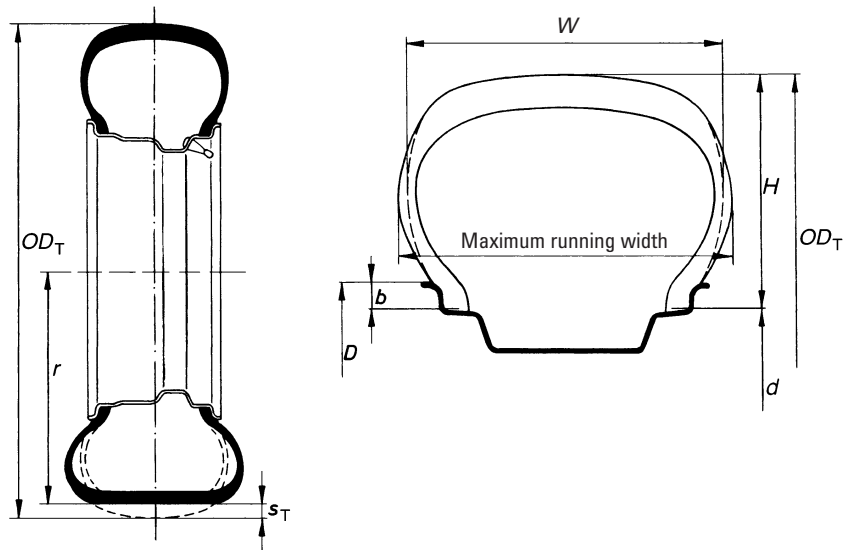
Tyre dimensions specified in standards and directives. B is the cross-section width of the new tyre; the tread moulding (as can be seen in Fig. 2.1) is not included in the dimension. For clearances, the maximum running width with the respective rim must be taken into consideration, as should the snow chain contour for driven axles. The tyre radius, dependent on the speed, is designated r (see Section 2.2.8). Pictured on the left is an asymmetrical well-base rim, which creates more space for the brake caliper and allows a larger brake disc (Fig. 2.10).
